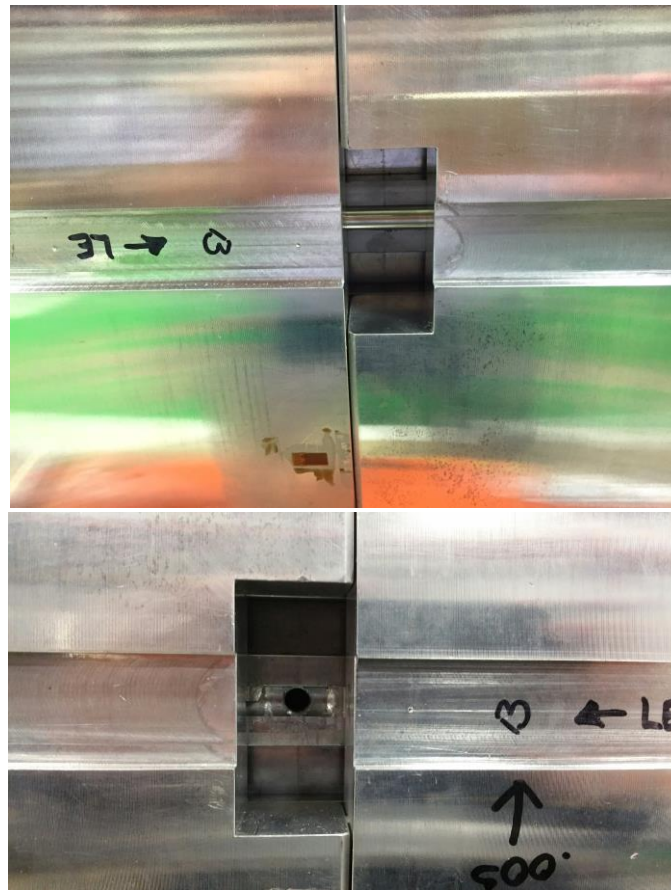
Upper picture where Guide Pin needed to be removed. Lower picture Guide Pin removed.
